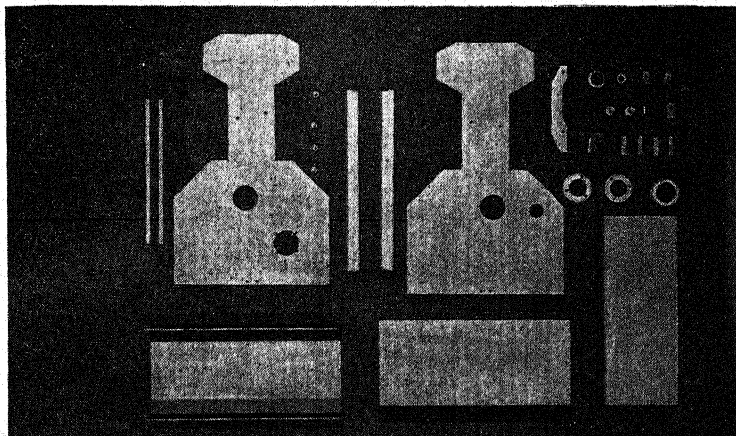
The 34 parts which compose the arc welded steel frame.
